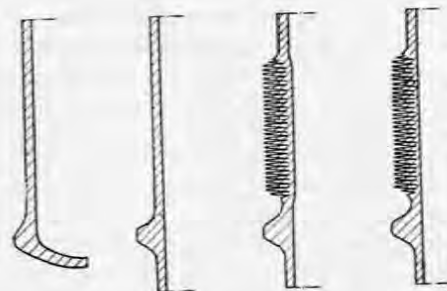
Production operations of rolled fins on the cylinder of the BMW 801 aircraft engine.
